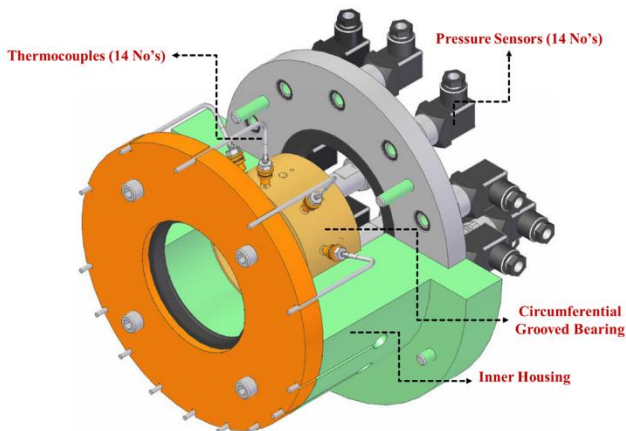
Pressure sensors and thermocouples along grooved bearing circumference.
